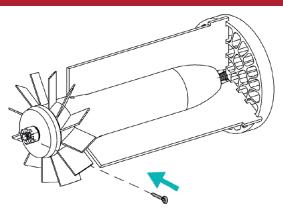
CASTLE NUT INSTALLATION
